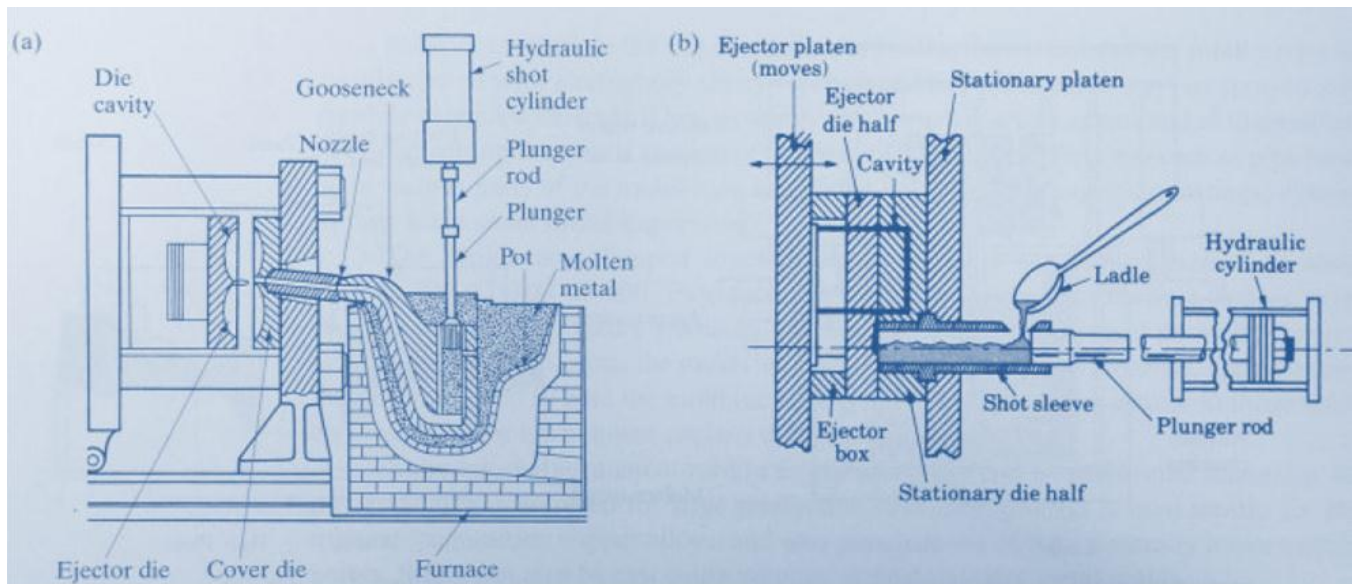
(a) Hot chamber die casting (b) Cold chamber die casting [source: Kalpakjian & Schmid]
